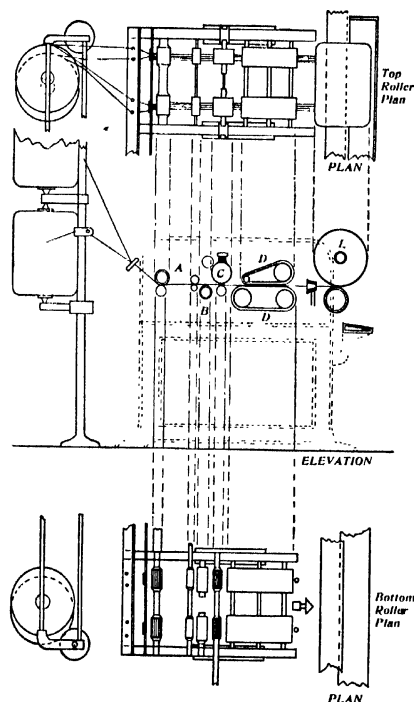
French Drawing Frame in Plan and Elevation.—*A*, back drafting rollers; *B*, porcupine; *C*, front drafting rollers; *D*, rubbing leathers; *E*, bulling head.
